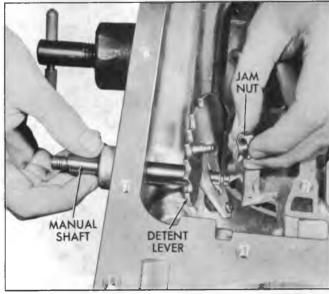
T-Installing Detent Lever and Jam Nut to Manual Shaft
